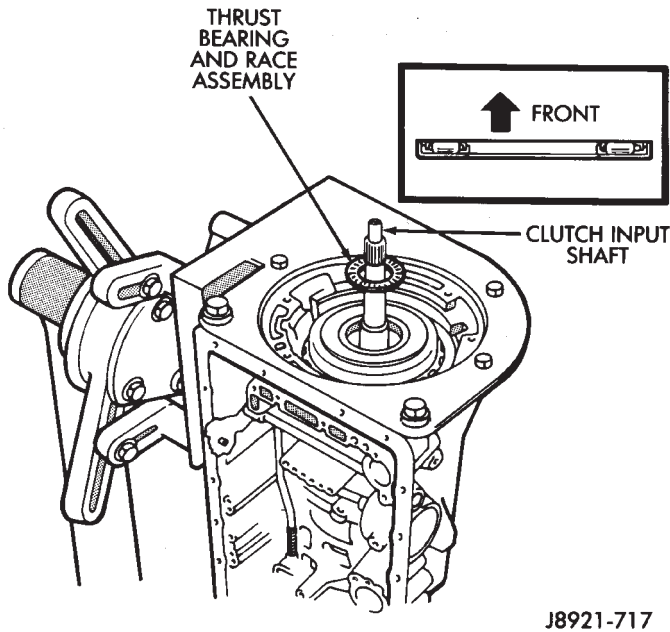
Installing Input Shaft Thrust Bearing And Race Assembly
